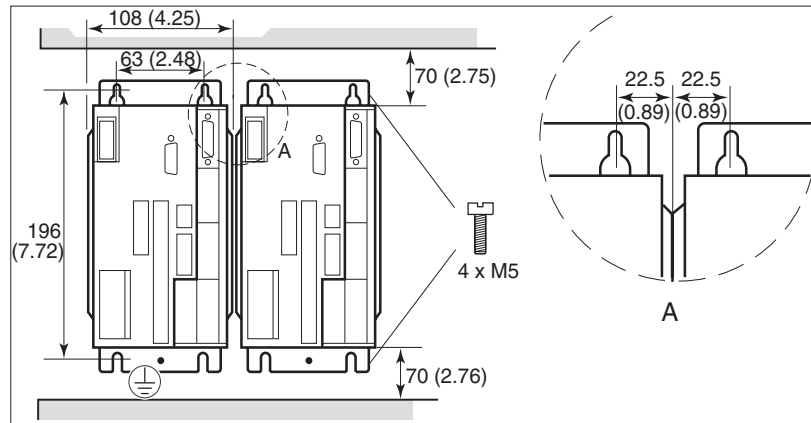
Installation clearances, dimensions in mm (in.)
